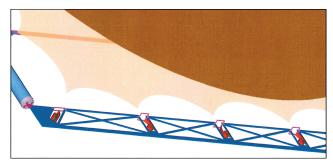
Flat panel mounted with constant force springs (without showing roll-up shells).
